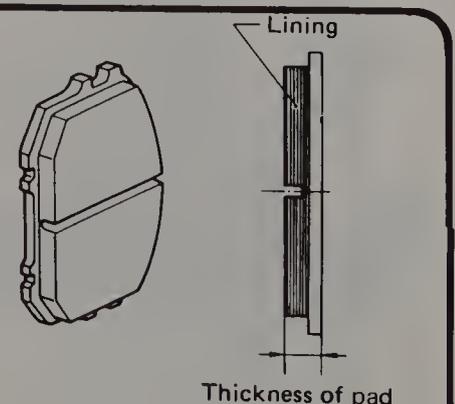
Disc brake pad thickness measurement (Sec 31)
